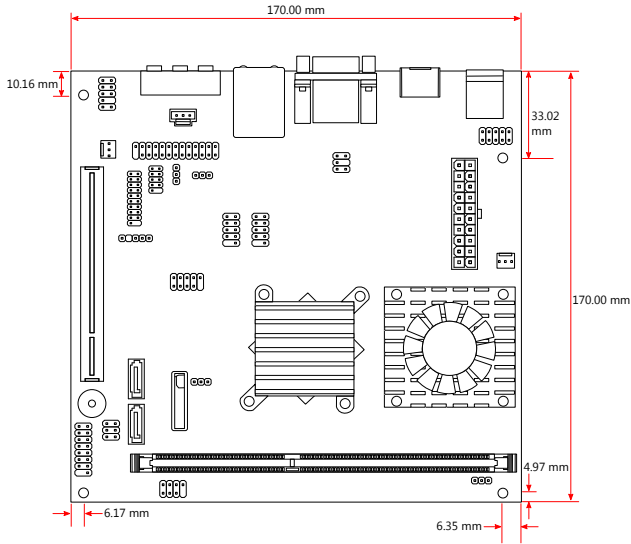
Mounting holes and dimensions of the VB7008 mainboard
